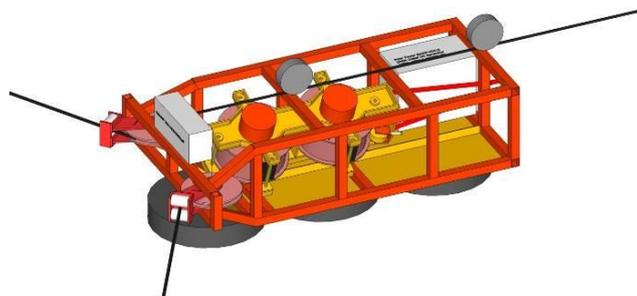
Alpha prototype mobile tail hold carriage with twin capstan winches
